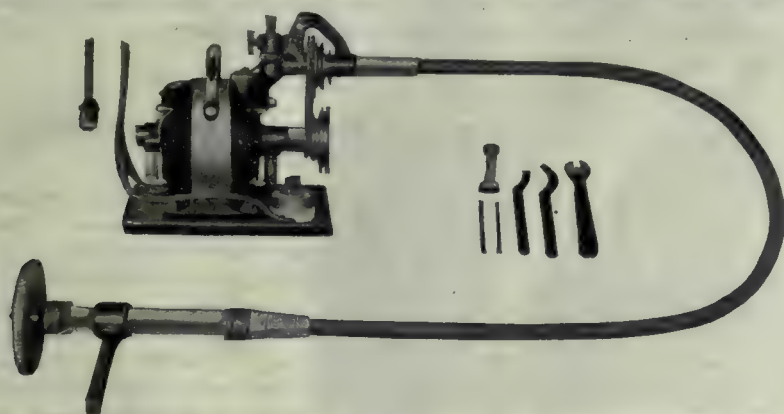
MOTOR-DRIVEN TOOL POST EQUIPMENT FOR INTERNAL AND EXTERNAL GRINDING.
